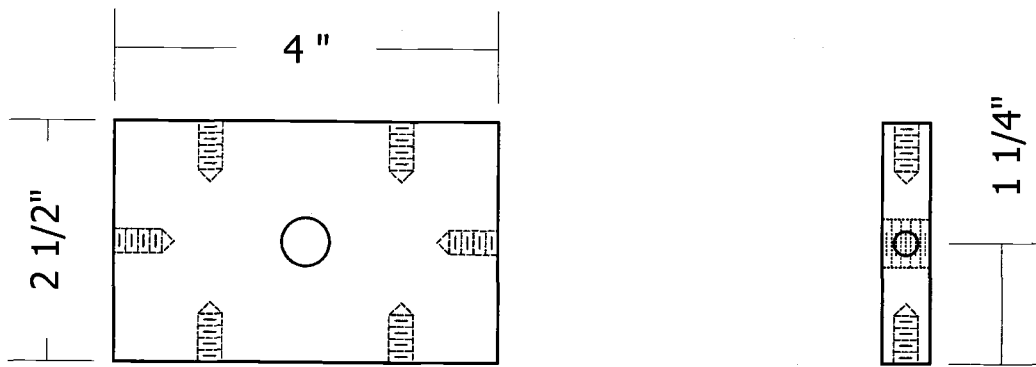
Bottom piece of fluidized bed. Scale 1:1, measures in inches.
